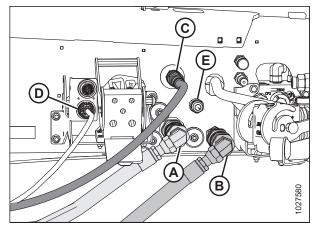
Hydraulics and Electrical Installed – Auger/Rotary/Draper-Ready Windrower
